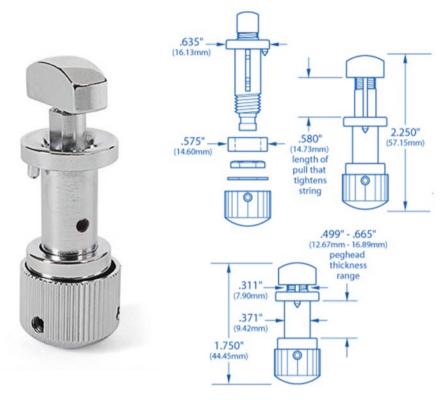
Steinberger gearless tuner (images courtesy of Stewart MacDonald, stewmac.com)
